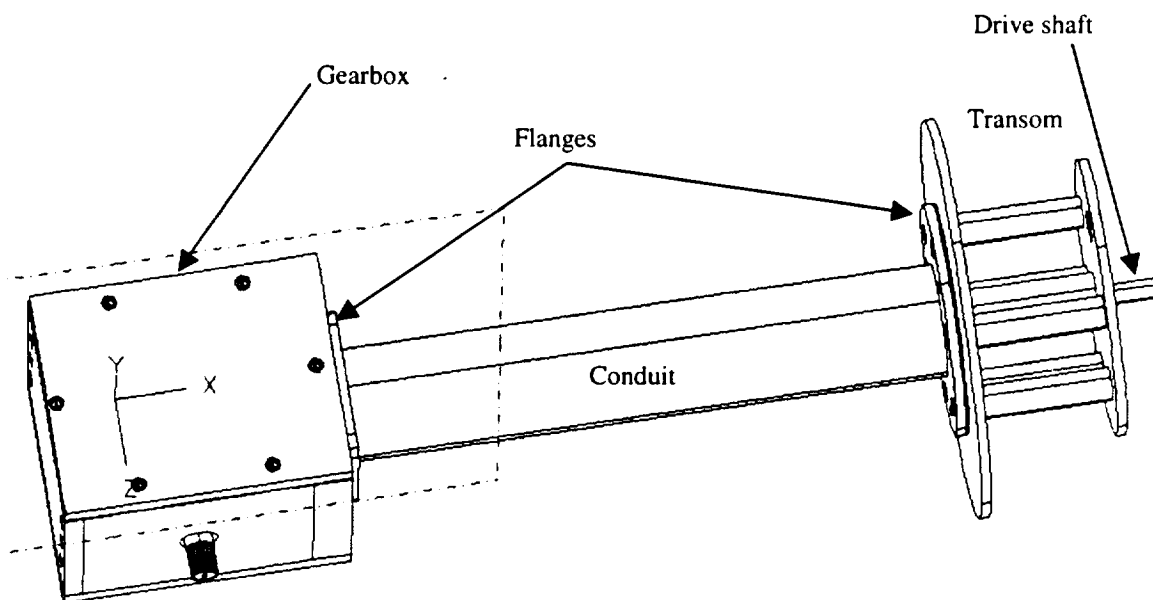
View of the conduit showing the attachment flanges and internal structure of the transom.
